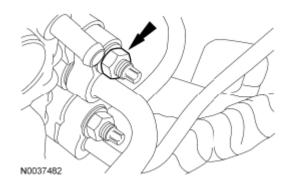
Locating Upper A/C Condenser Tube Mounting Nut Courtesy of FORD MOTOR CO.
